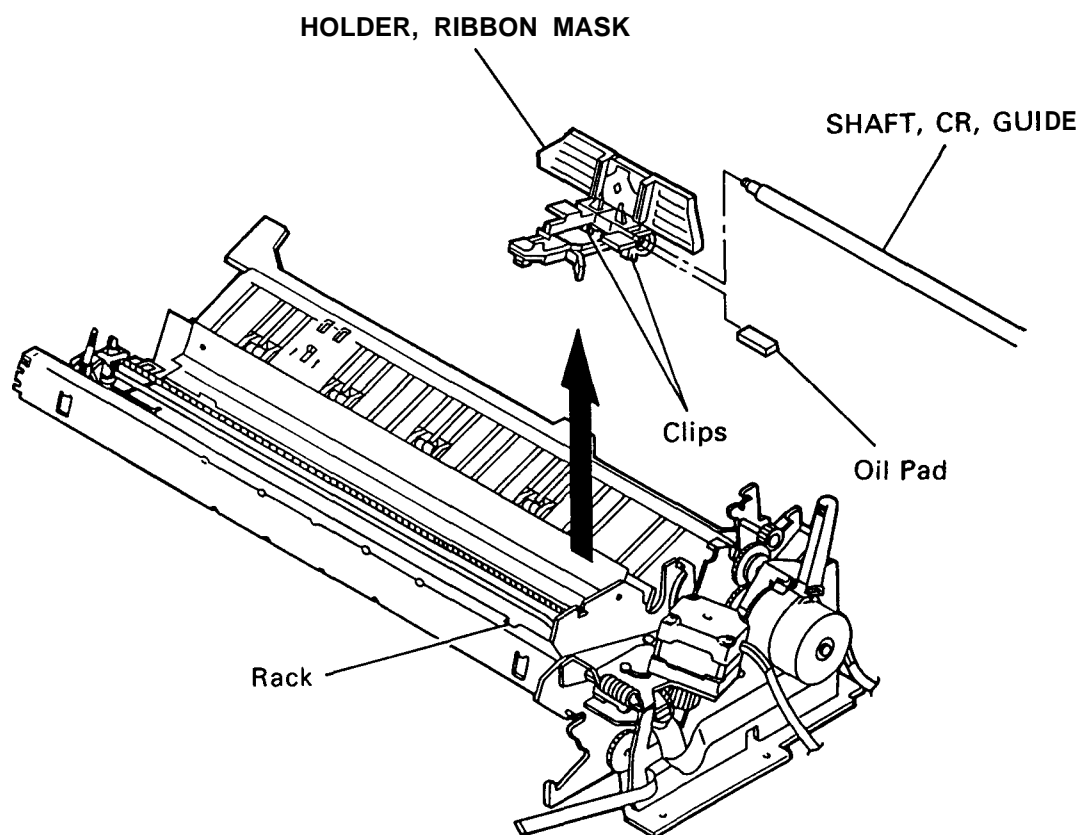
Removing the CARRIAGE GUIDE ASSEMBLY
